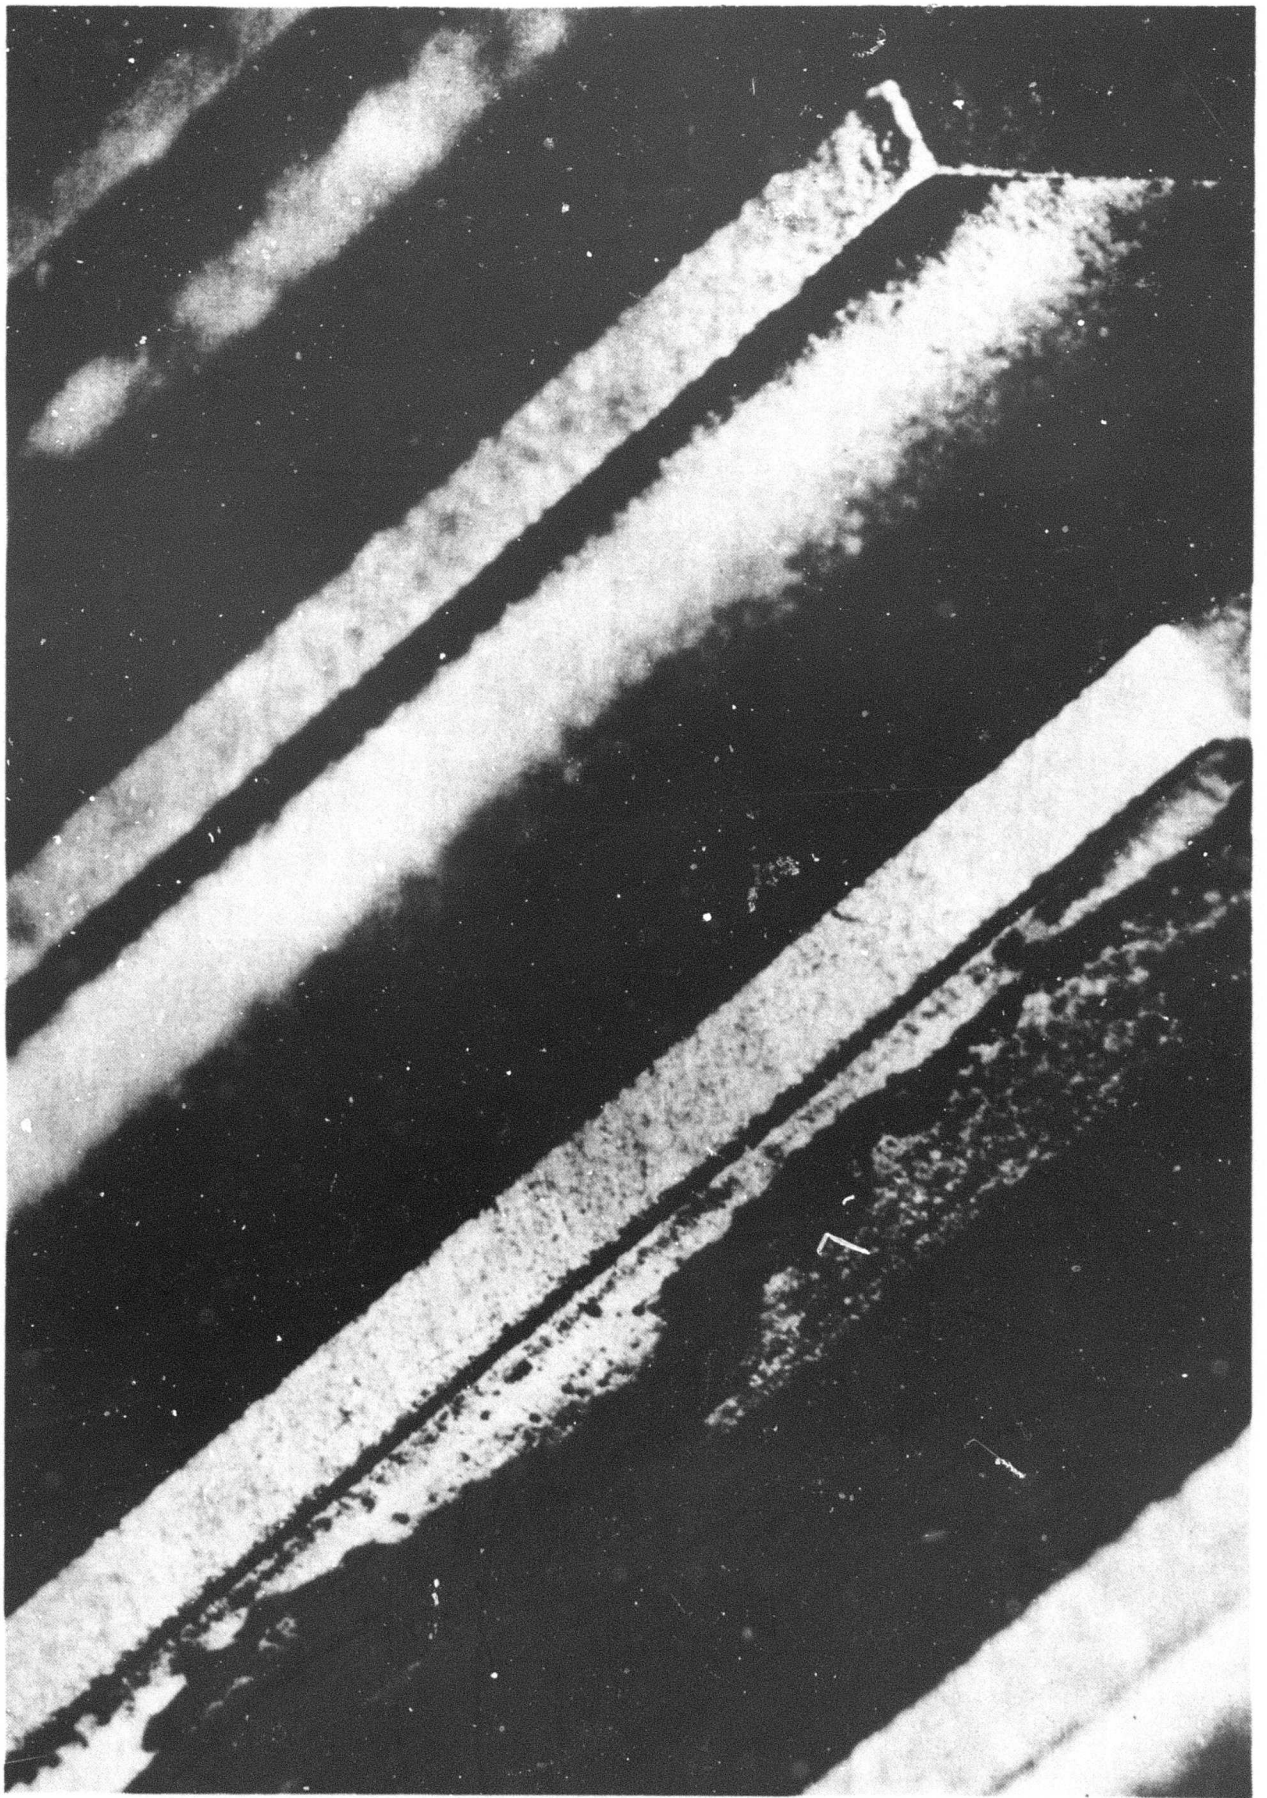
Motor-Pump Driven Gear Tooth Magnified
